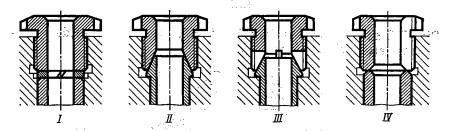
Locking hollow screws which hold down internal parts I—by spring ring; II—by taper socket on screw end; III—by split taper socket on screw end; V—by split clastic screw
